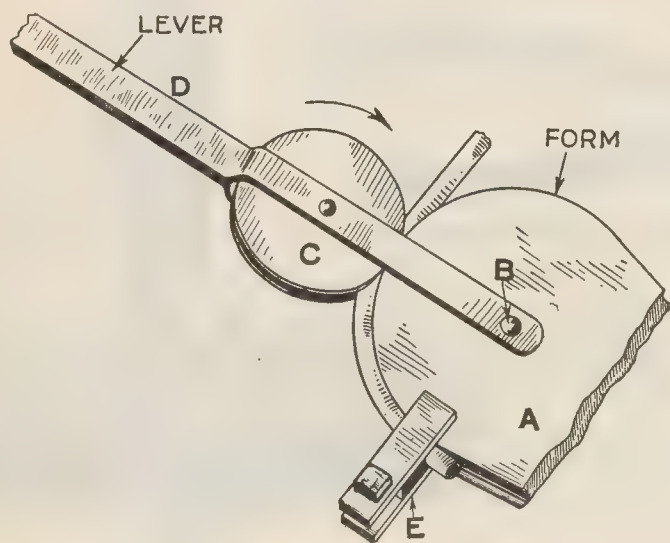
,279.—Common bending device consisting of a circular form A, with bending pulley C, radially hinged at B. Owing to the considerable effort required to bend pipe, the part A, must be very securely fastened to some rigid support. *In bending* the lever is brought over to the projection E, and pipe placed in position. Then the lever is forced around in the direction indicated by the arrow, thus bending the pipe to conform with the bending form. The pipe, of course, must first be filled with sand and capped to prevent buckling, and also heated if the bending radius be small enough to require heating.
